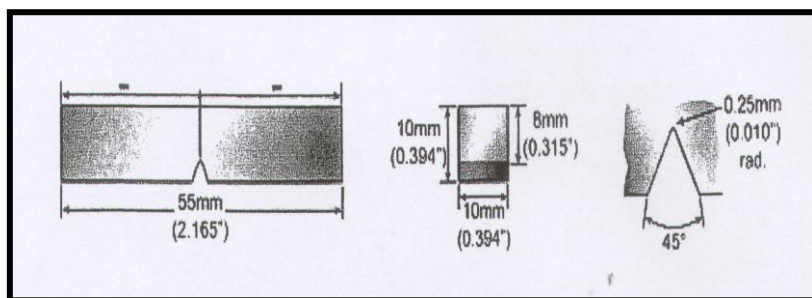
Charpy V-notch test piece dimensions for full sized specimens
